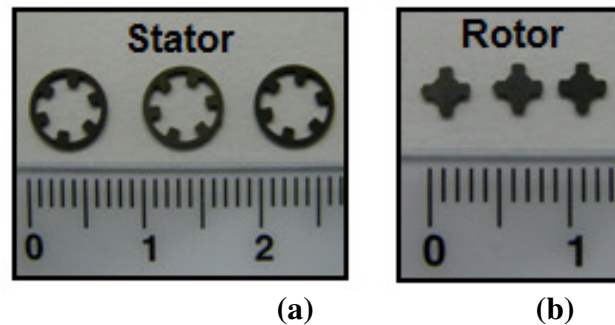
Rotor and Stator strips obtained from the electroerosion wire cutting process – (a) Stator – (b) Rotor. Scale in centimeters.
